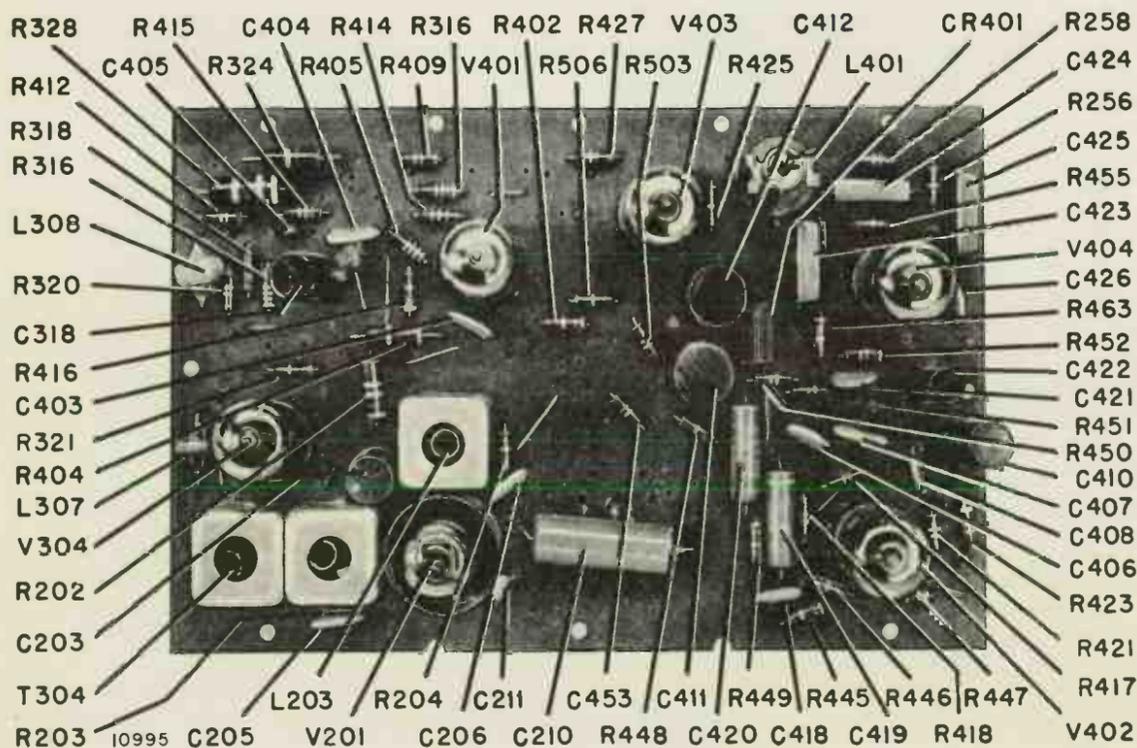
View of Component Side of Printed Wiring Board A5780-4 Used in 16U1C, 16A1C, 16W1C, and 16AW1C Chassis.
